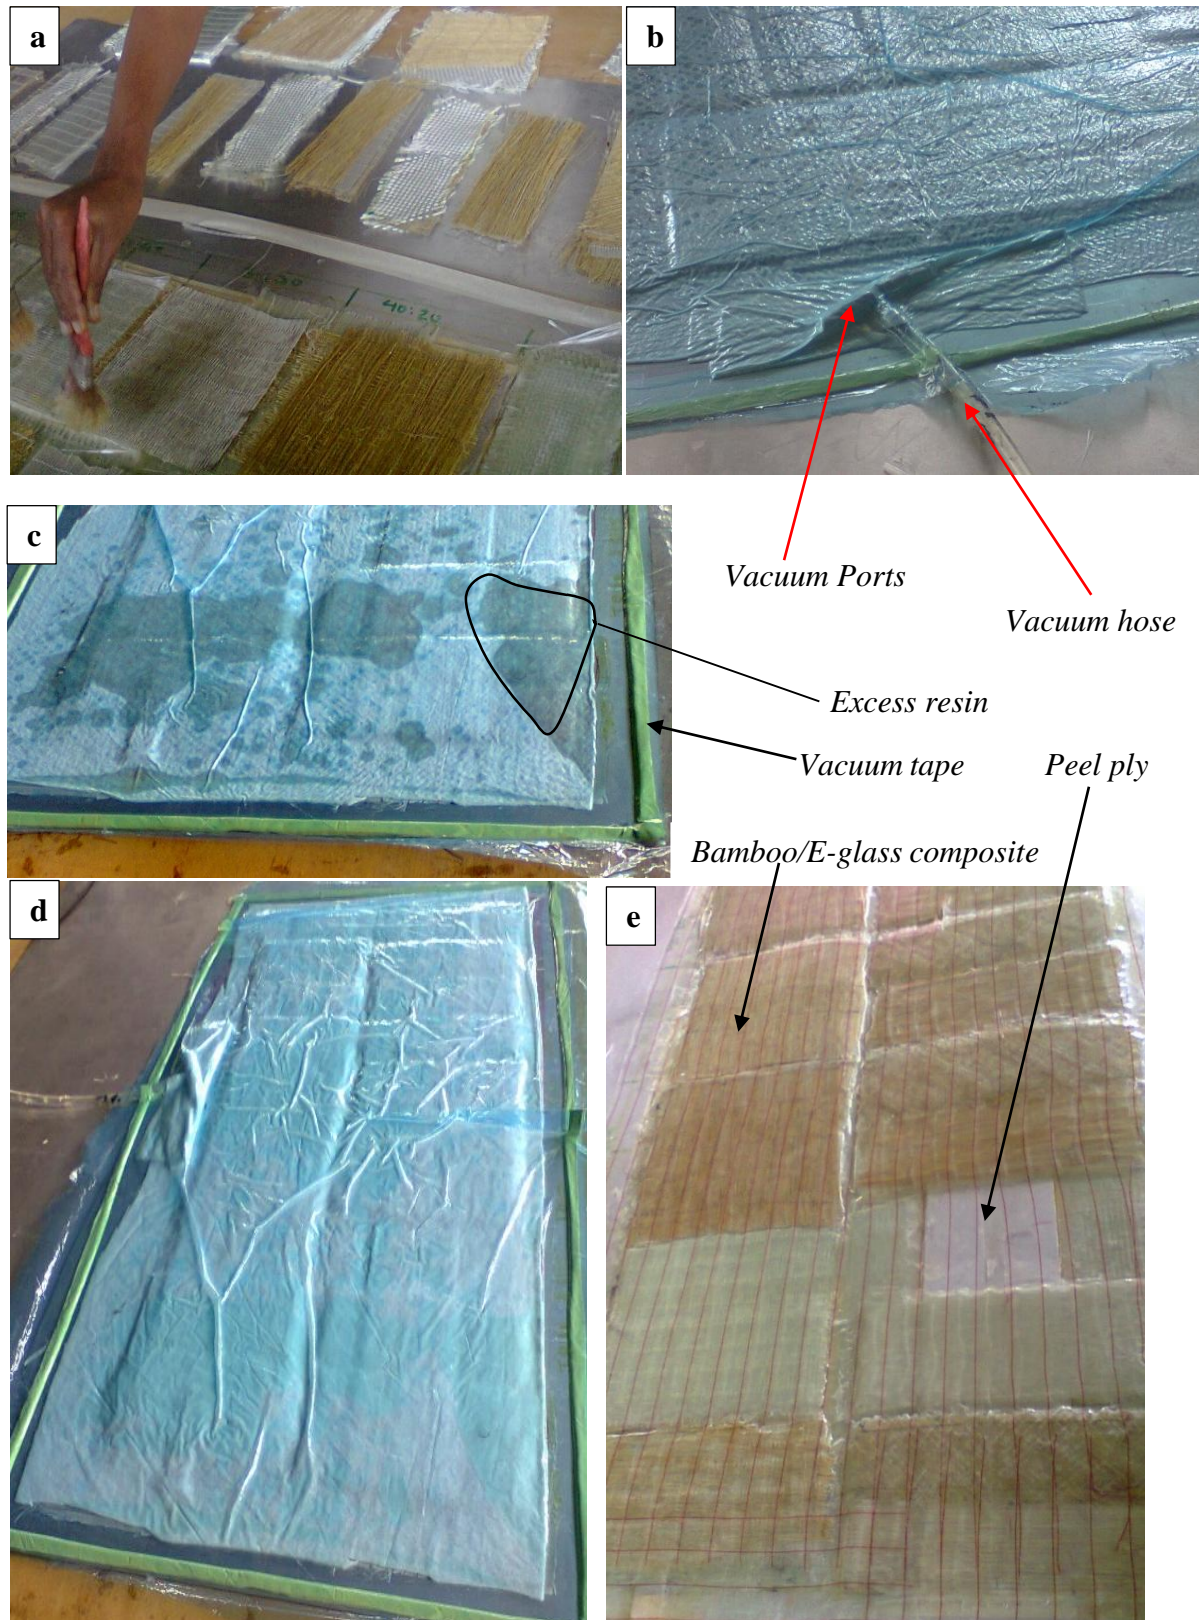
Hand Lay-up Assisted by Vacuum bagging technique
